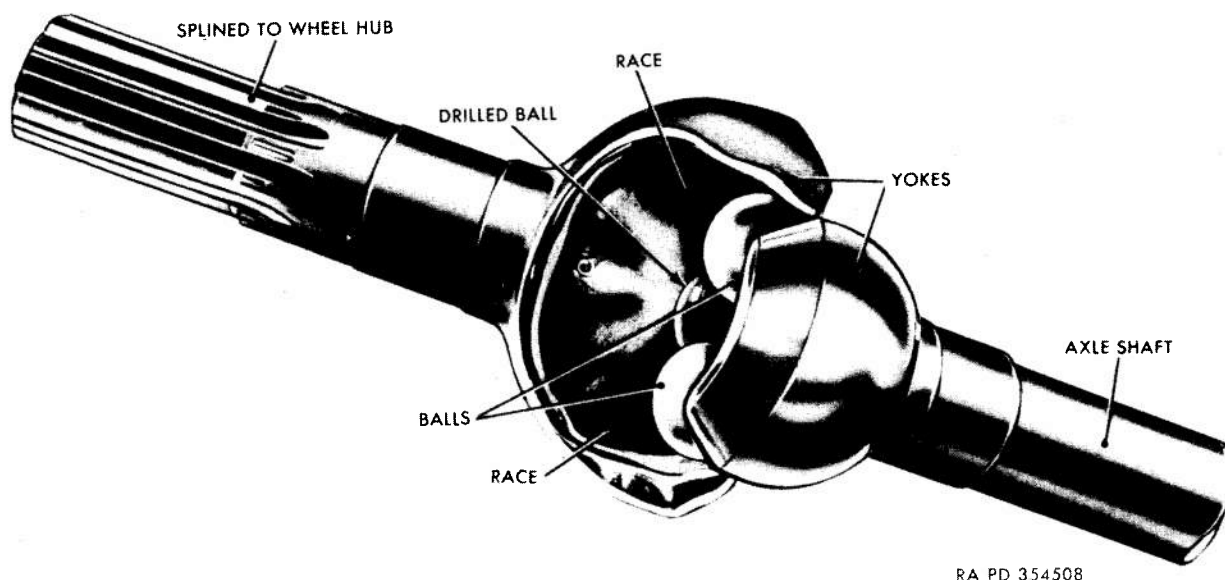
Bendix-Weiss Constant Velocity Universal Joint—Assembled View
